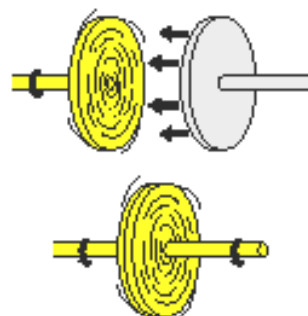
Disc or Clutch Drive (Friction Disc)
